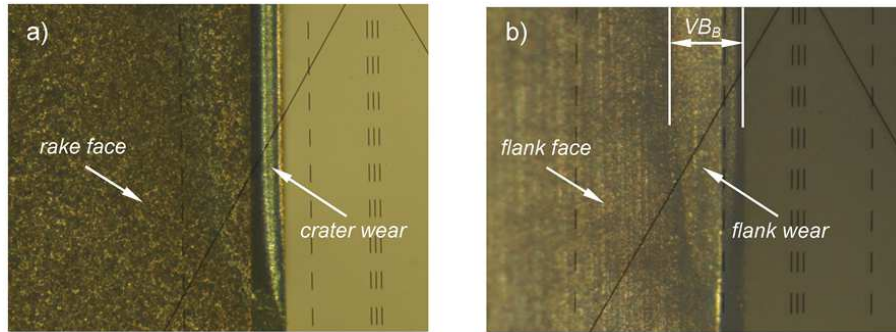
Rake face with visible crater wear (a) and flank face with visible flank wear VB_B (b)
